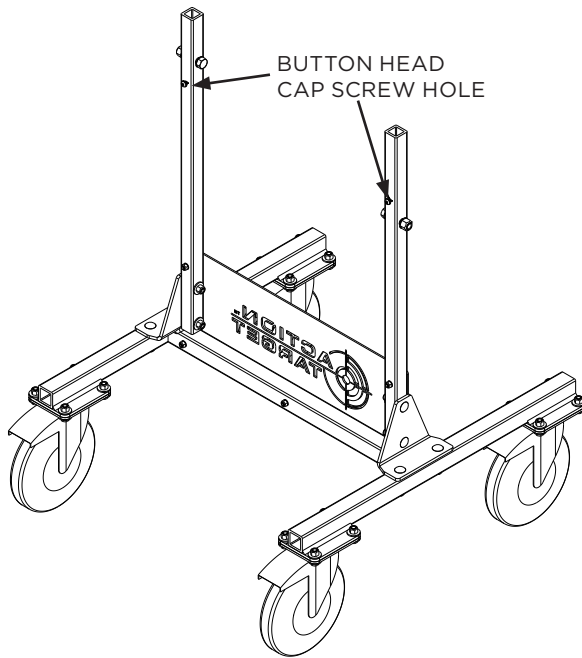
BUTTON-HEAD CAP SCREW HOLE FACES THE BACK
